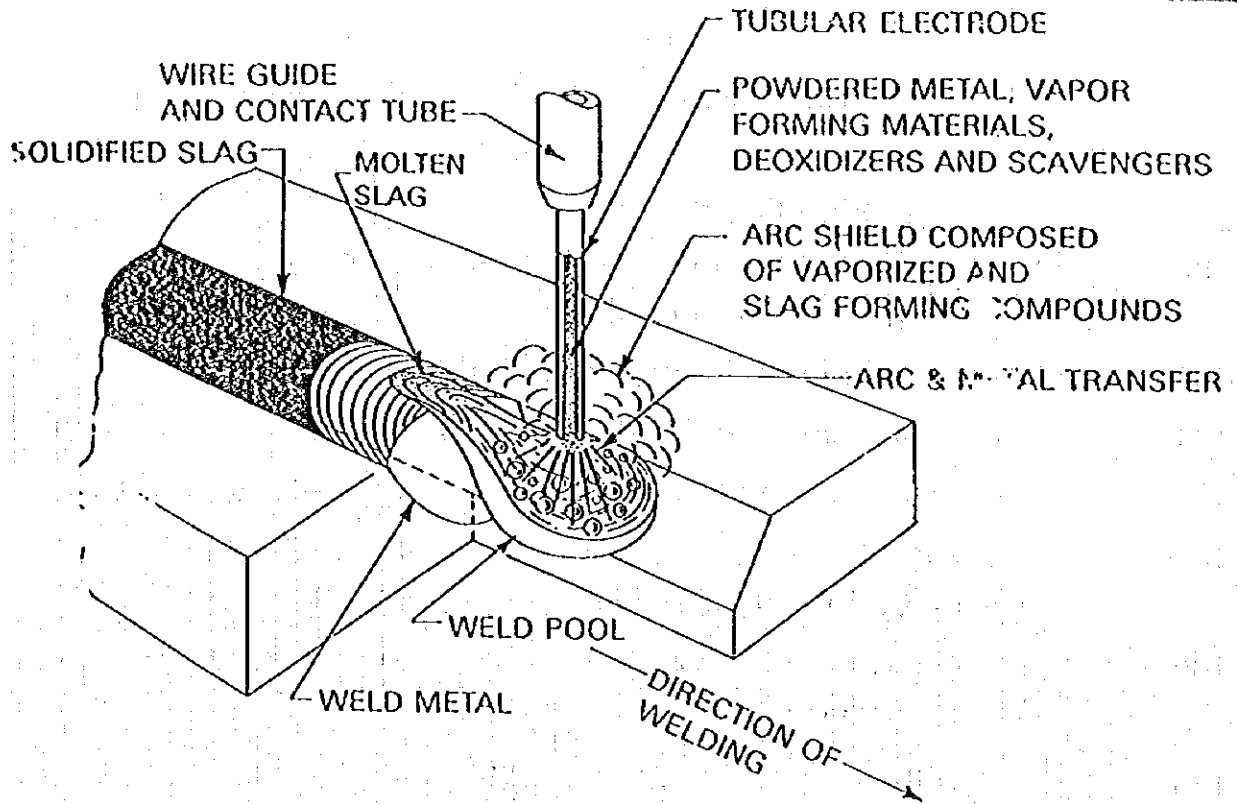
Self-Shielded Flux Cored Arc Welding
